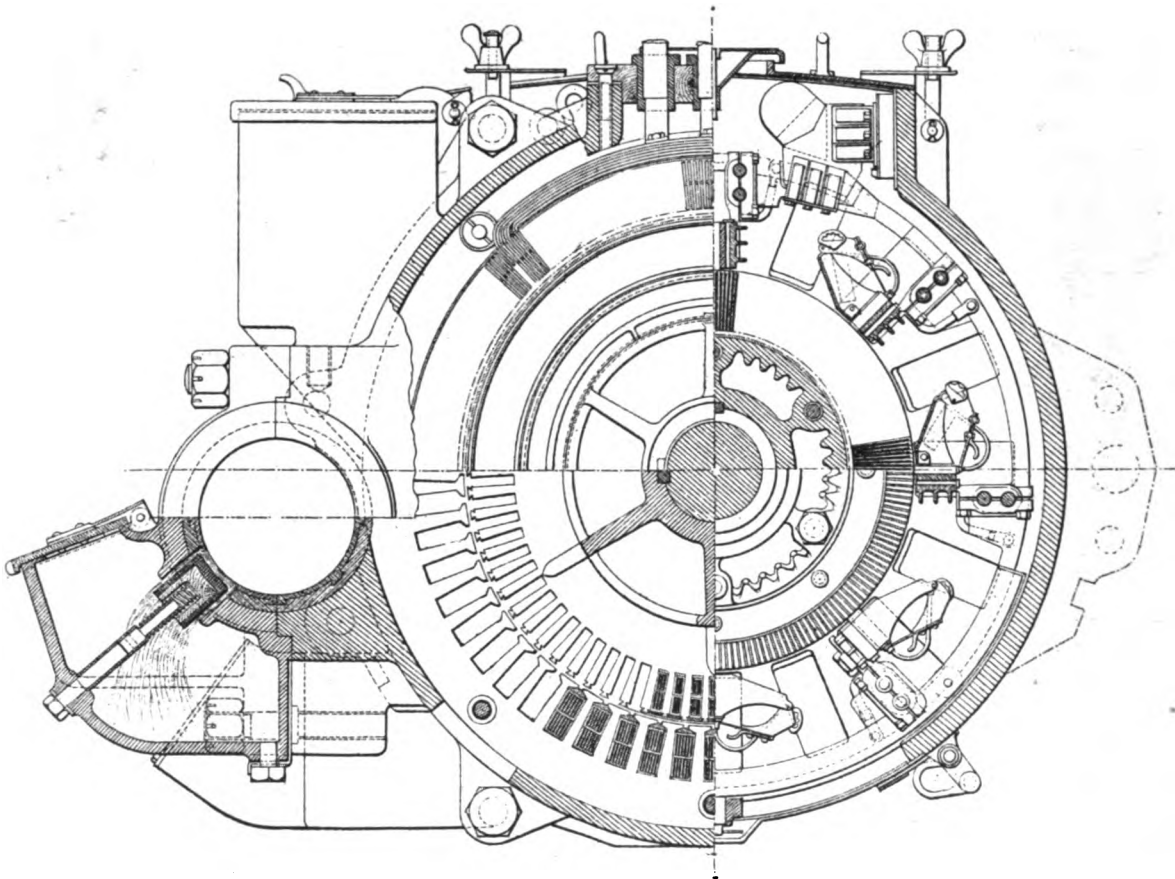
CROSS-SECTION OF SIEMENS MOTOR
